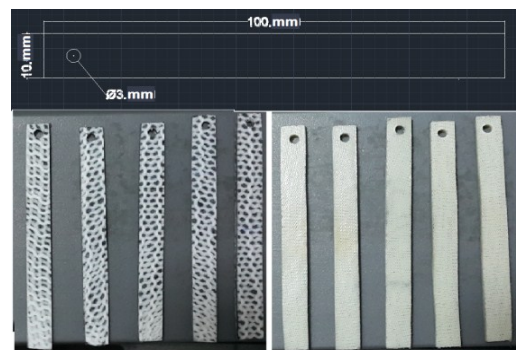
Fatigue test specimens and the dimensions for available and suggested material.
